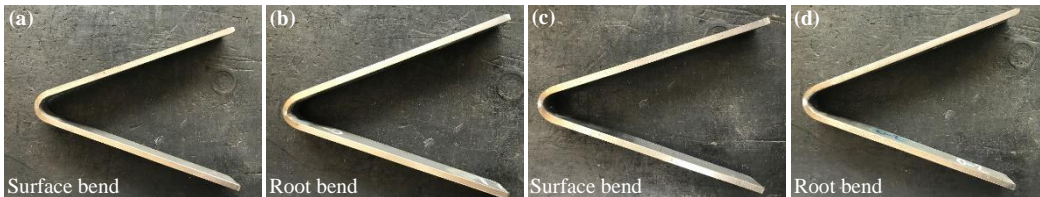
Macrographs showing the surface and root bend specimens, respectively, extracted from: (a) and (b) lower; and (c) and (d) higher heat input joints. Note that no cracking occurred in any of the specimens.
